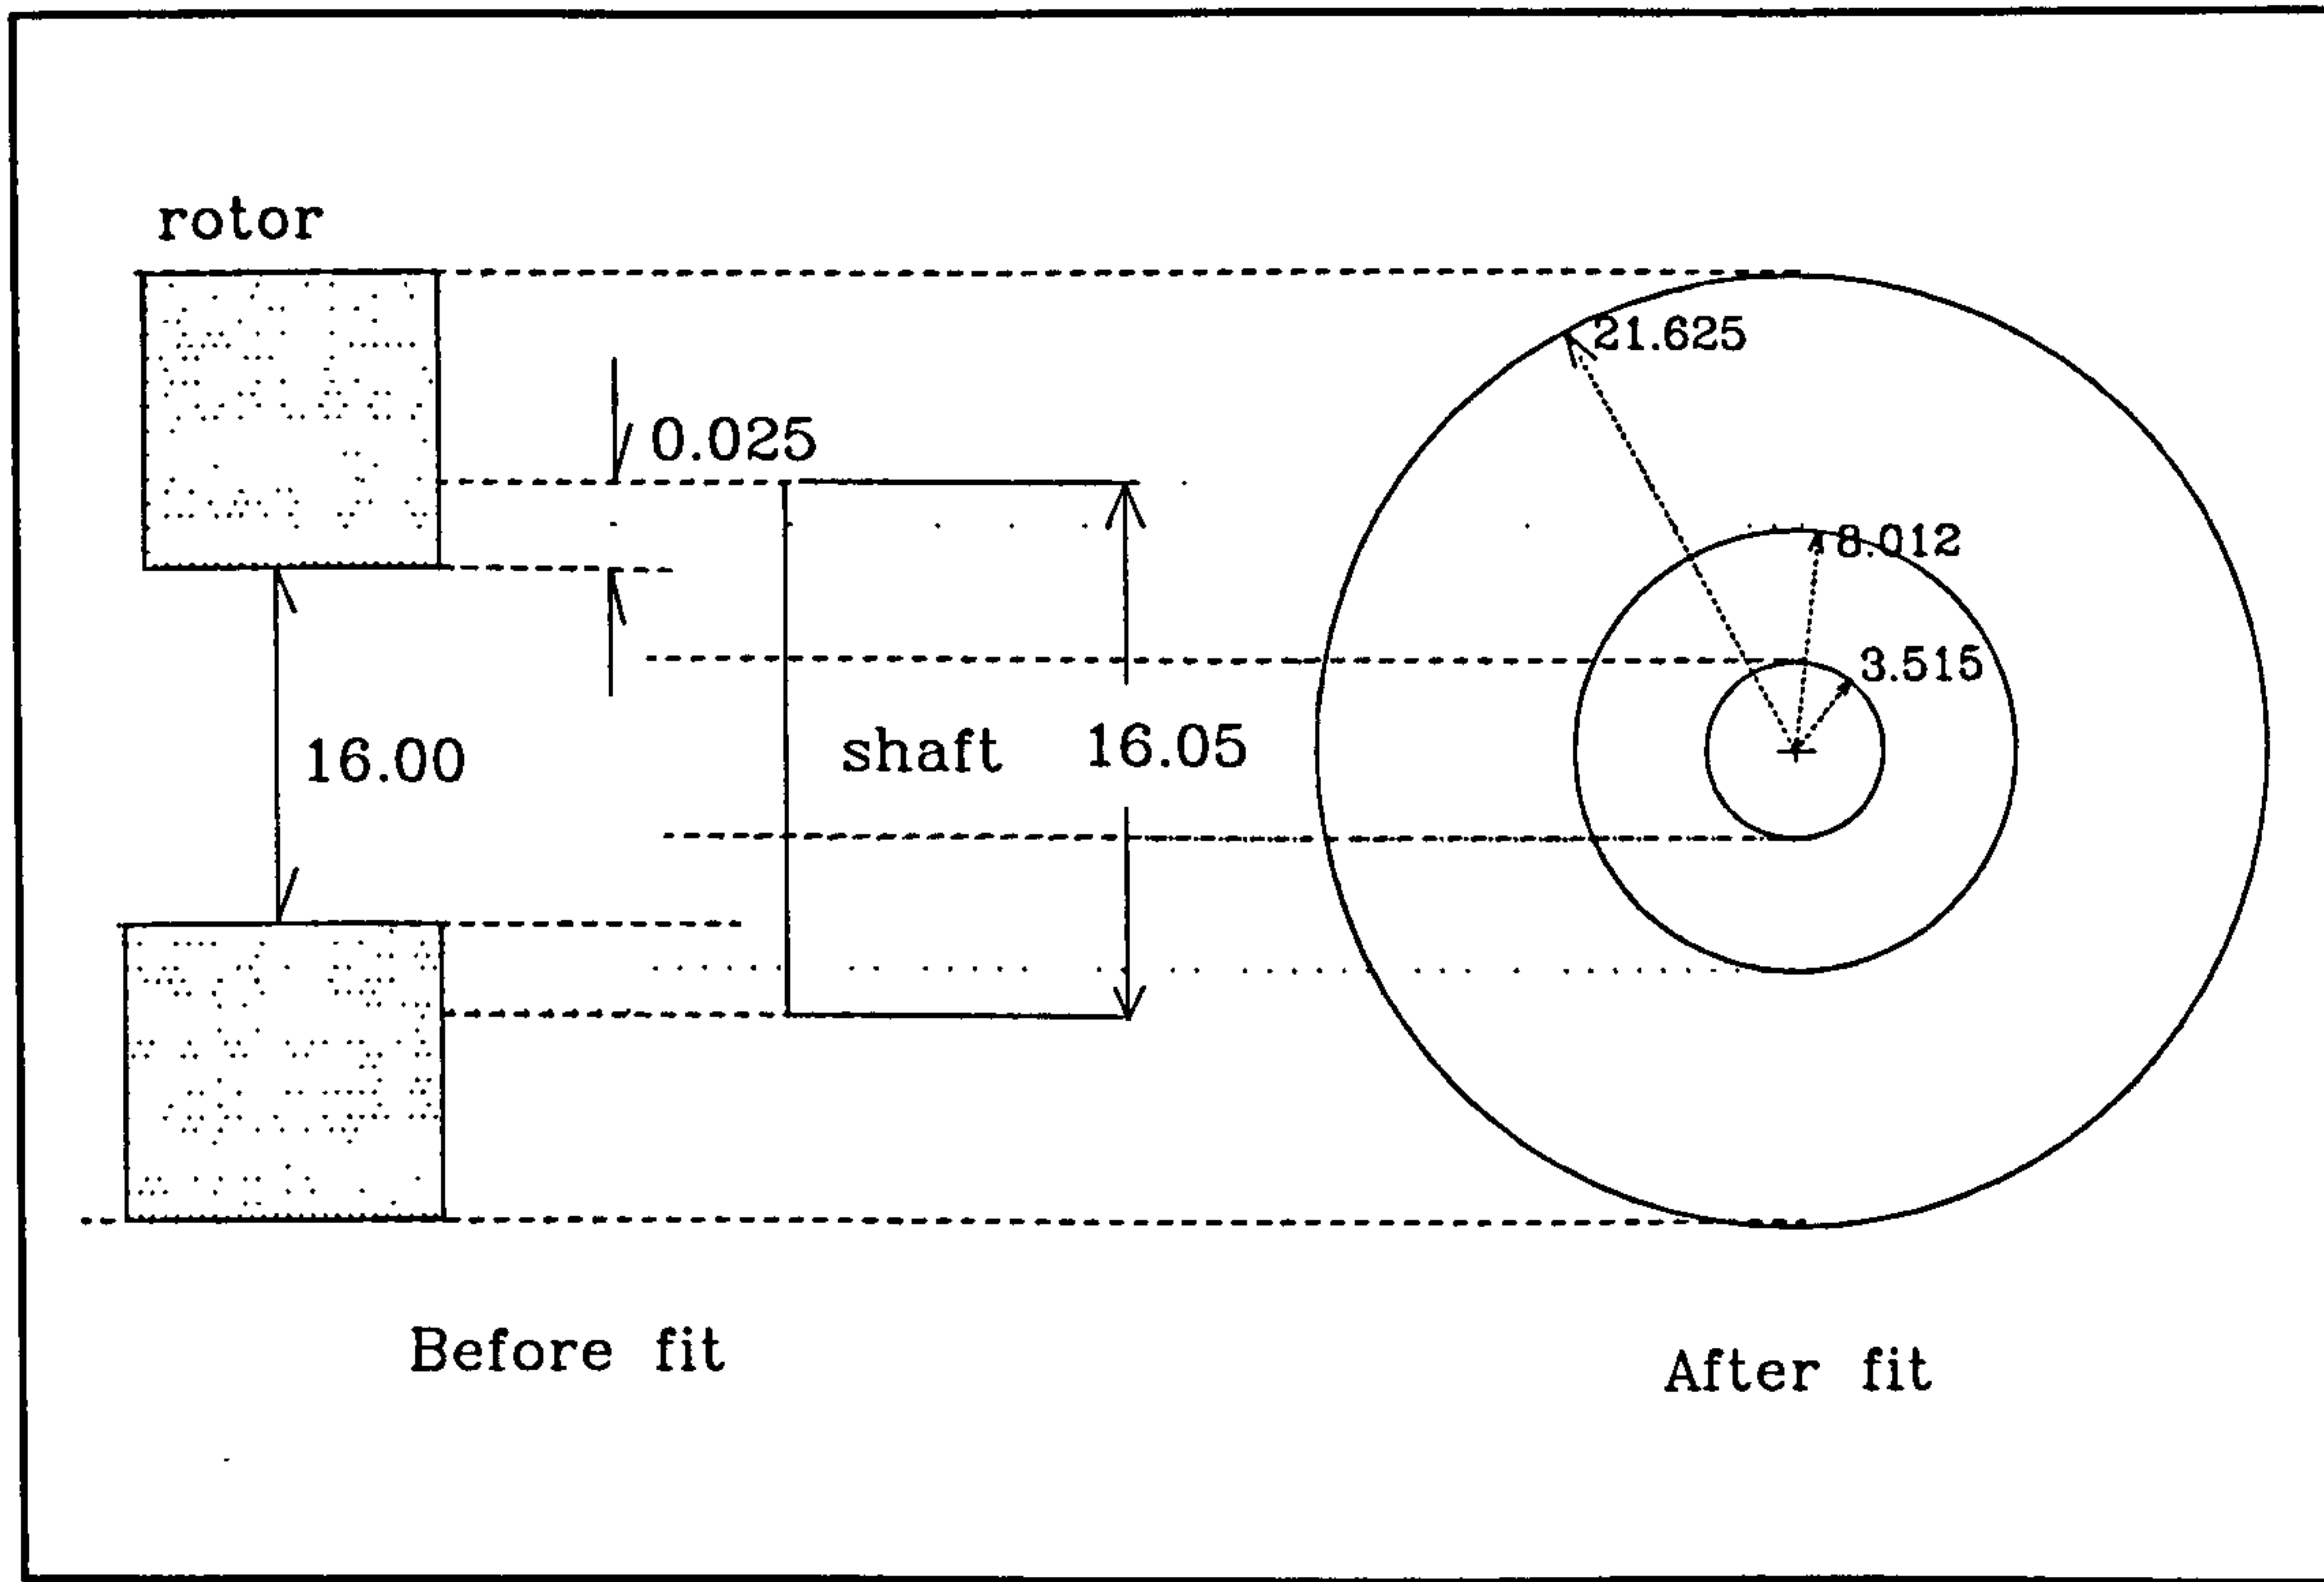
Shaft-Hub dimensions. Exaggerated dimensions before assembly. Front view after shrink fit.
